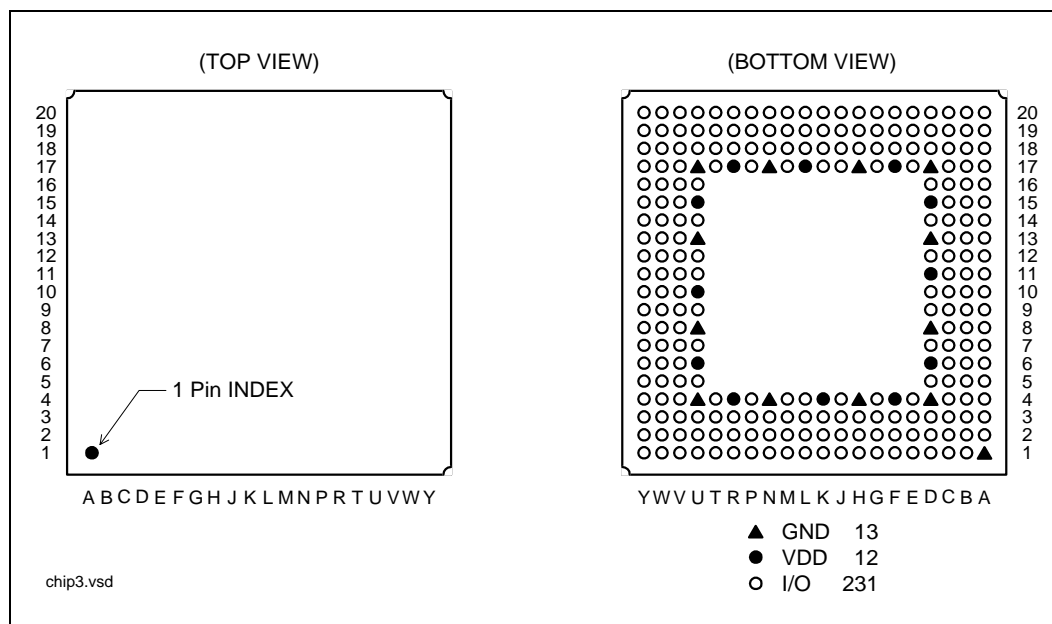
256-pin BGA Package Footprint, Top and Bottom View
